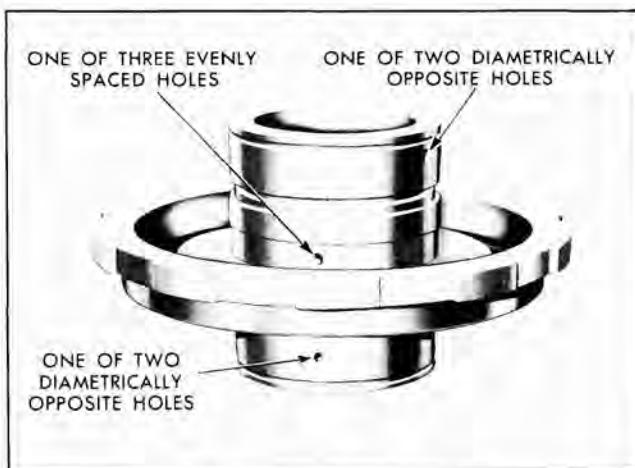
Passages in Rear Clutch Drum Sleeve (Cylinder)
